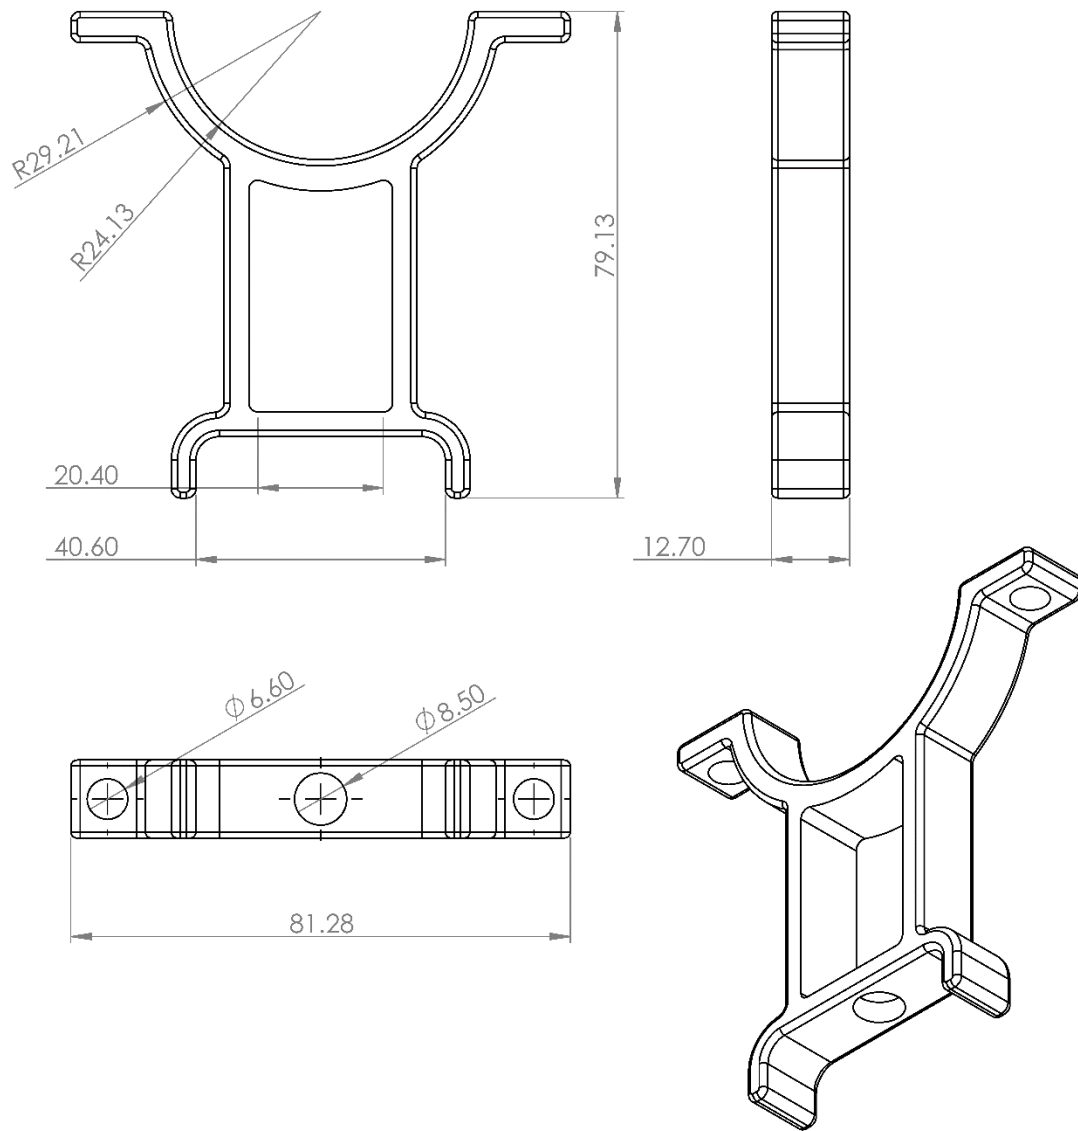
3D-printed tube collar (bottom) and mounting base for the impedance tube, the bottom of it sits on top of the slotted aluminum rail (unit: mm)
